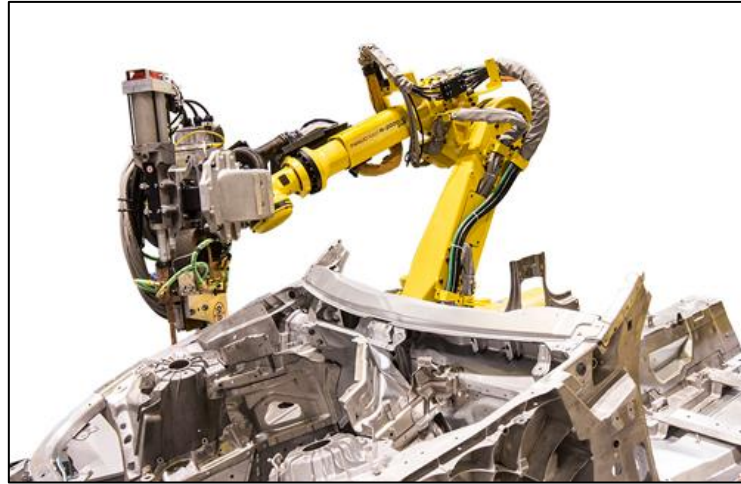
Spot Welding by Robotic Arm [57].
